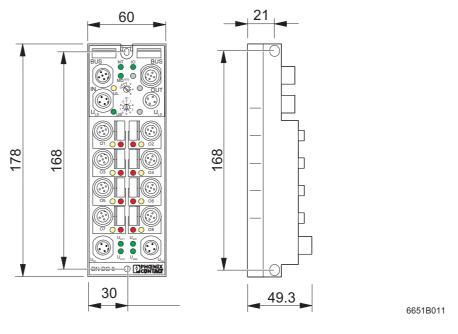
Housing dimensions in mm for FLS devices with actuator supply
